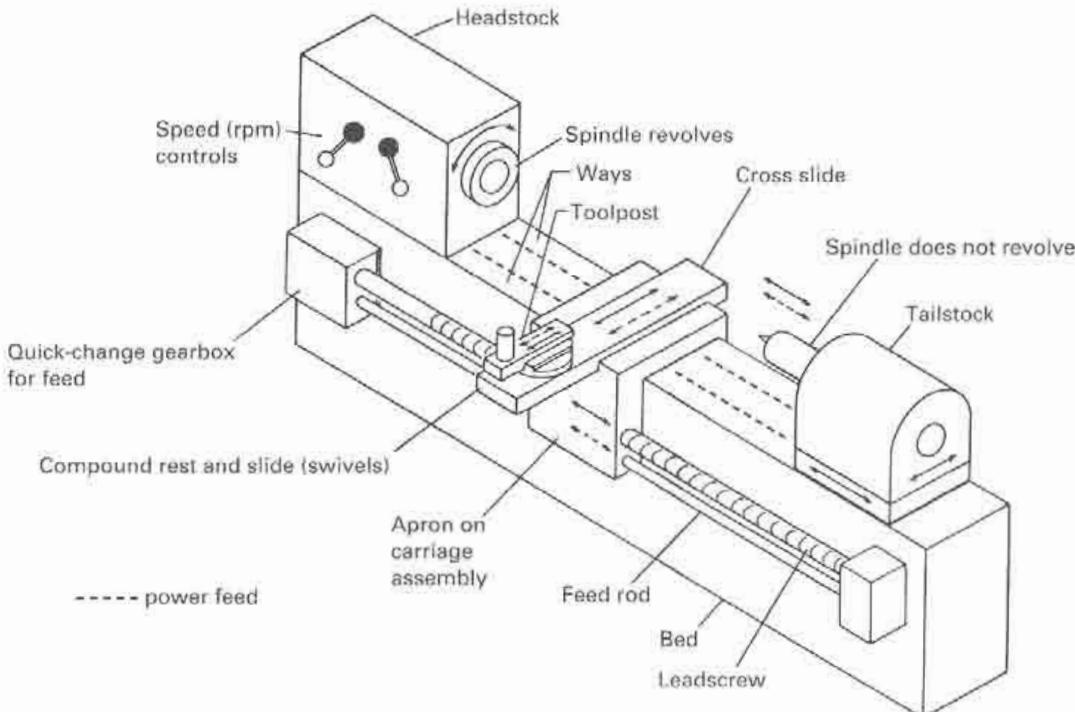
Schematic diagram of an engine lathe, showing basic components.
